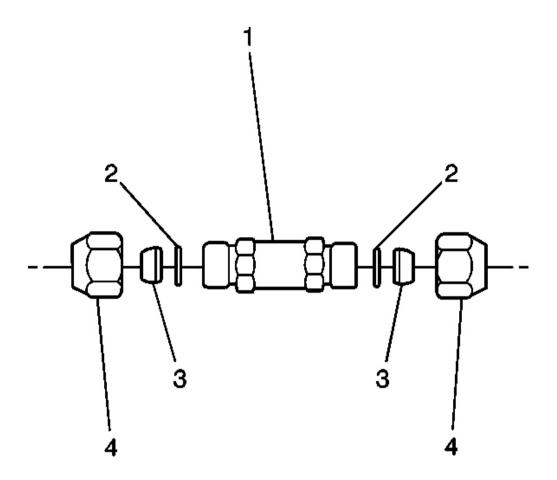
A/C Refrigerant Filter Components Courtesy of GENERAL MOTORS CORP.
